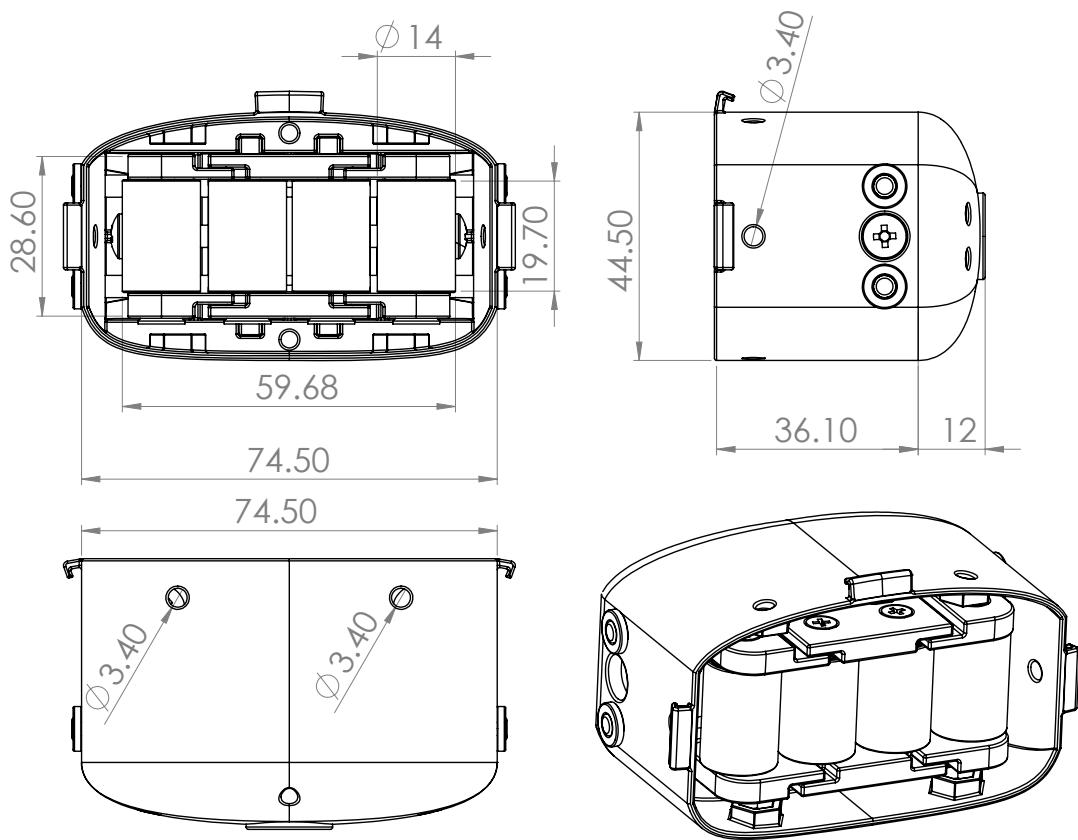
Technical drawing of the end-effector (mm). Preliminary prototype.
